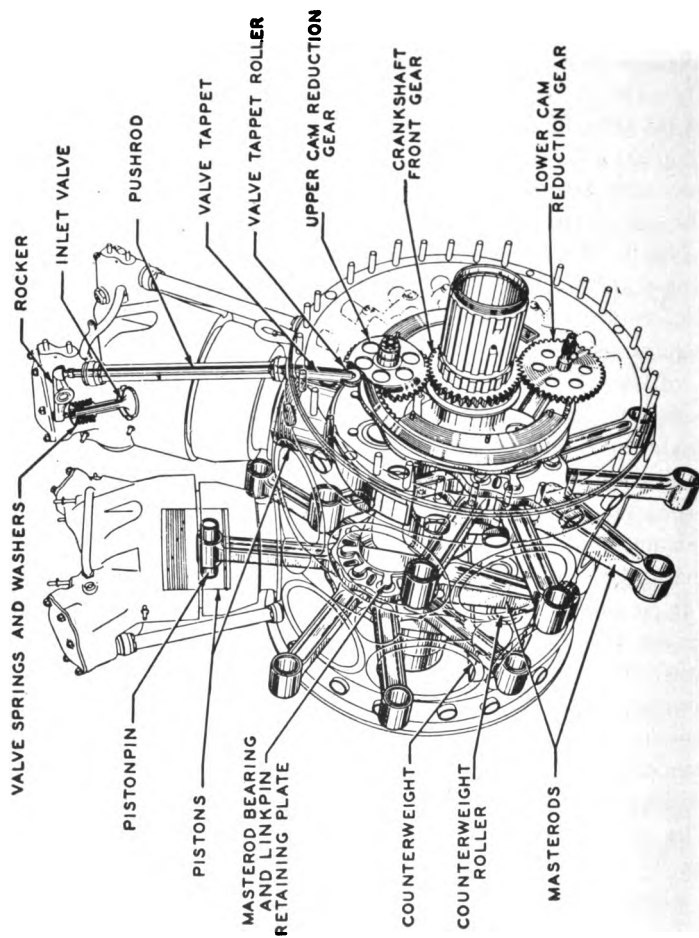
Phantom view of power section showing valve-operating mechanism.
